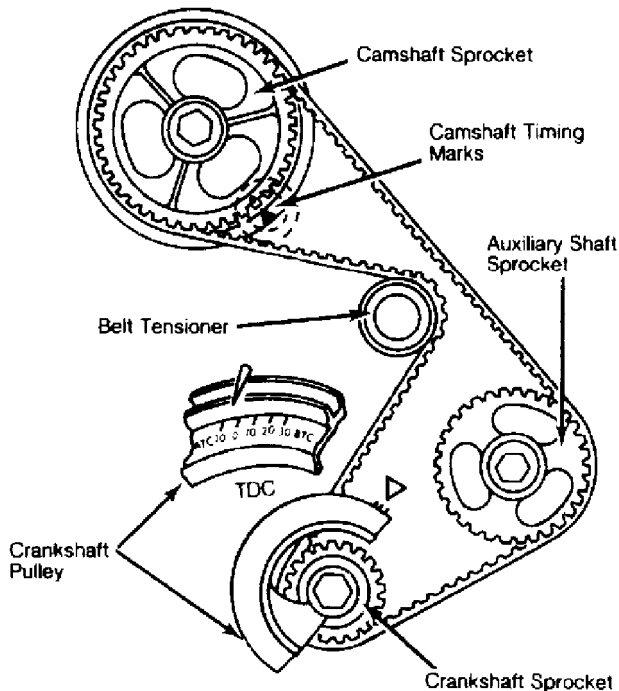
Timing Belt Sprocket Alignment - Typical
